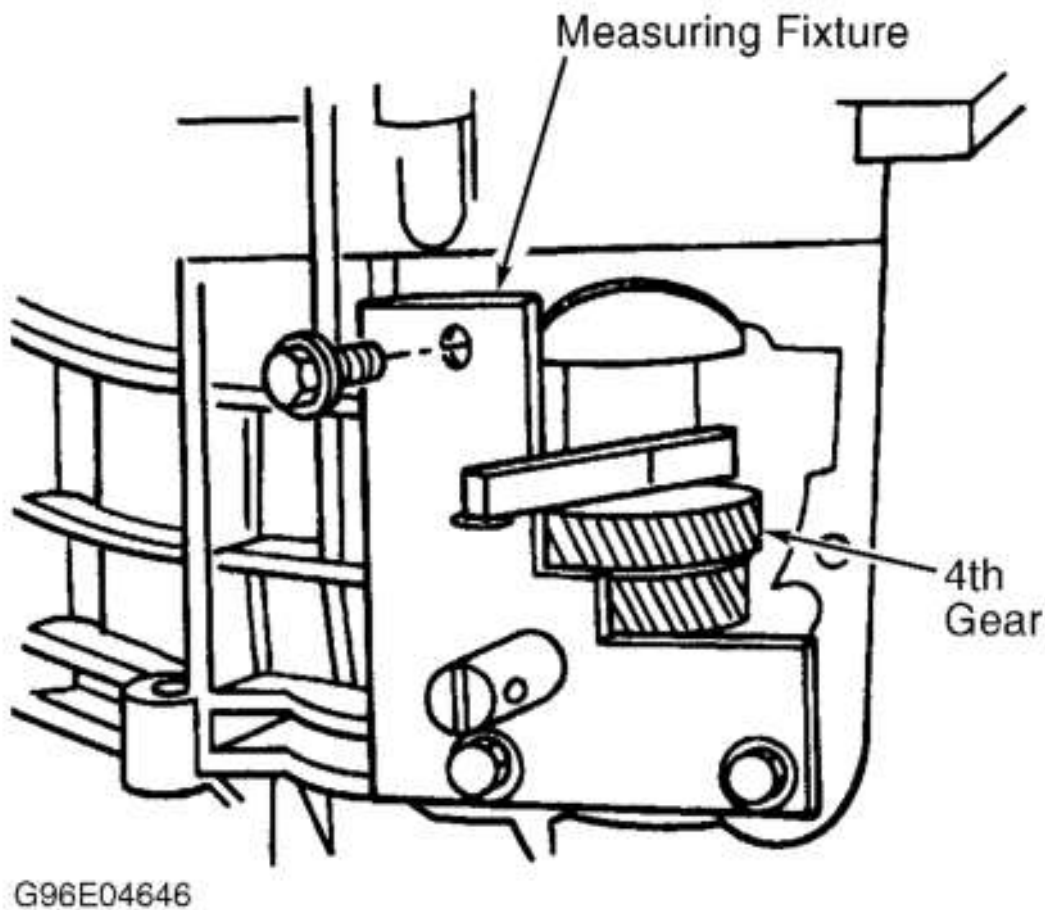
Installing Output Shaft End Play Measuring Fixture
